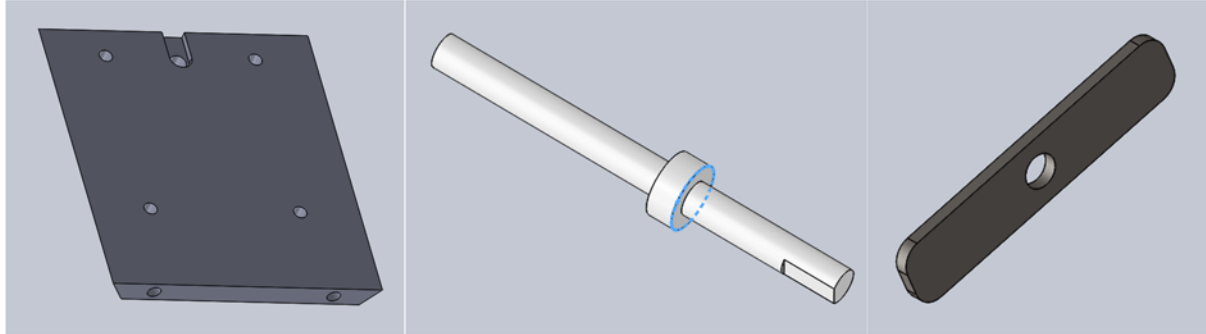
The individual components that must be manufactured for the spring-loaded, spool replacement process.
